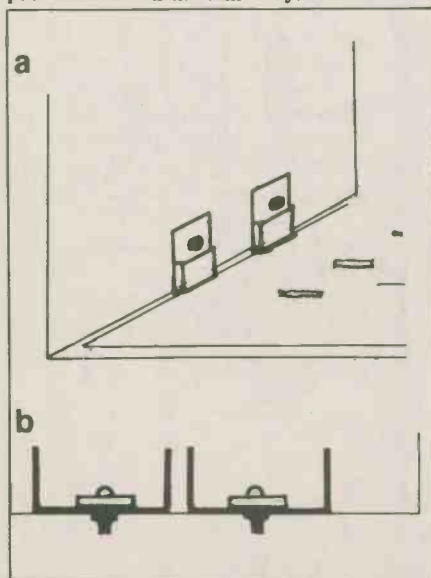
In (a) the regulators are mounted to the chassis with insulating kits; (b) shows the top view when using two small heatsinks.
